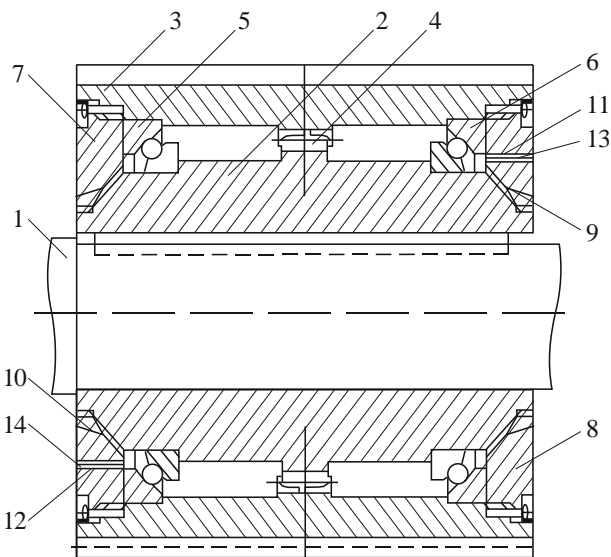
Self-adjusting tooth wheel: 1 – shaft; 2 – hub; 3 – rim; 4 – involute profile splines of a dome-shaped form; 5 and 6 – axial bearings; 7 and 8 – covers; 9 and 10 – consolidators; 11 and 12 – thread holes to supply lubricant; and 13 and 14 – stoppers
